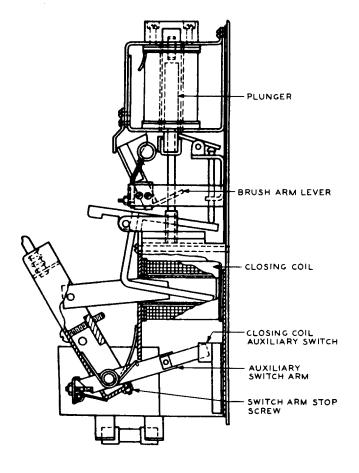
Undervoltage Device and Contactor Mechanism (Main Contacts Open Old Version)
